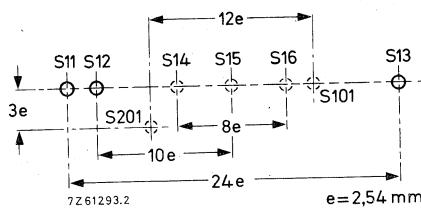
Hole pattern in the printed-wiring board for a single potentiometer (viewed on component side).
